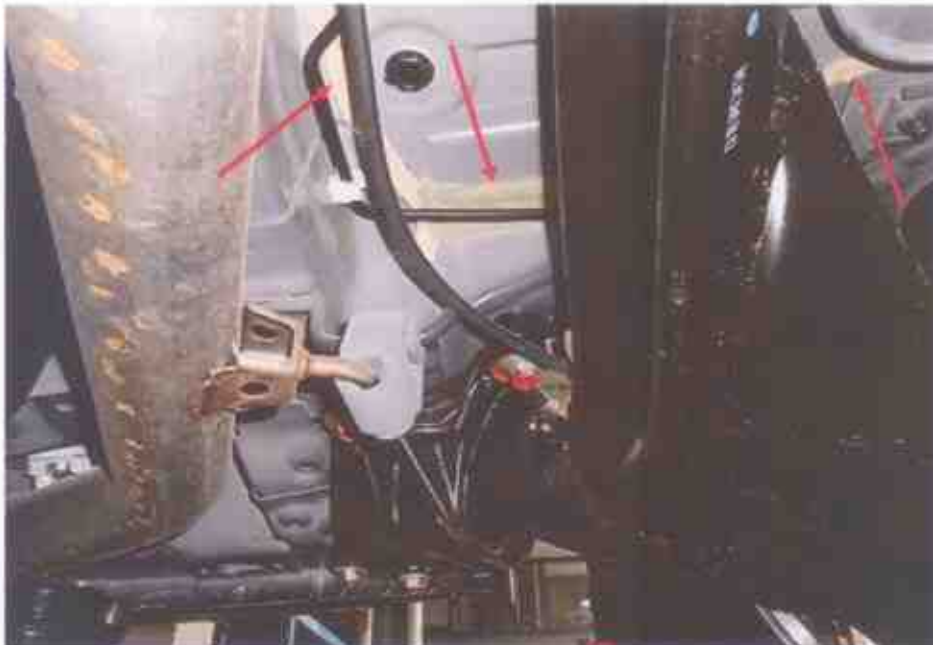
shows the structural body at the right rear of the Motor Car. Visually, I did not find any weld marks other than original spot weld marks on the chassis body of the Motor Car. The joints (arrowed) along the chassis body was also untouched, indicating no work was done on the chassis body of the Motor Car and that the chassis body was originally fitted.
